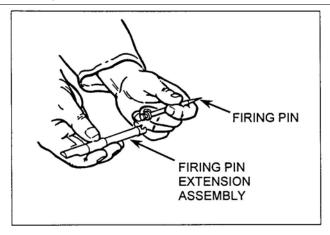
Attachment of the firing pin to the firing pin extension assembly
